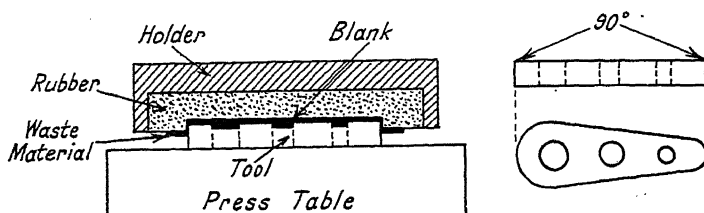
BLANKING A FORMER WITH A RUBBER PAD
